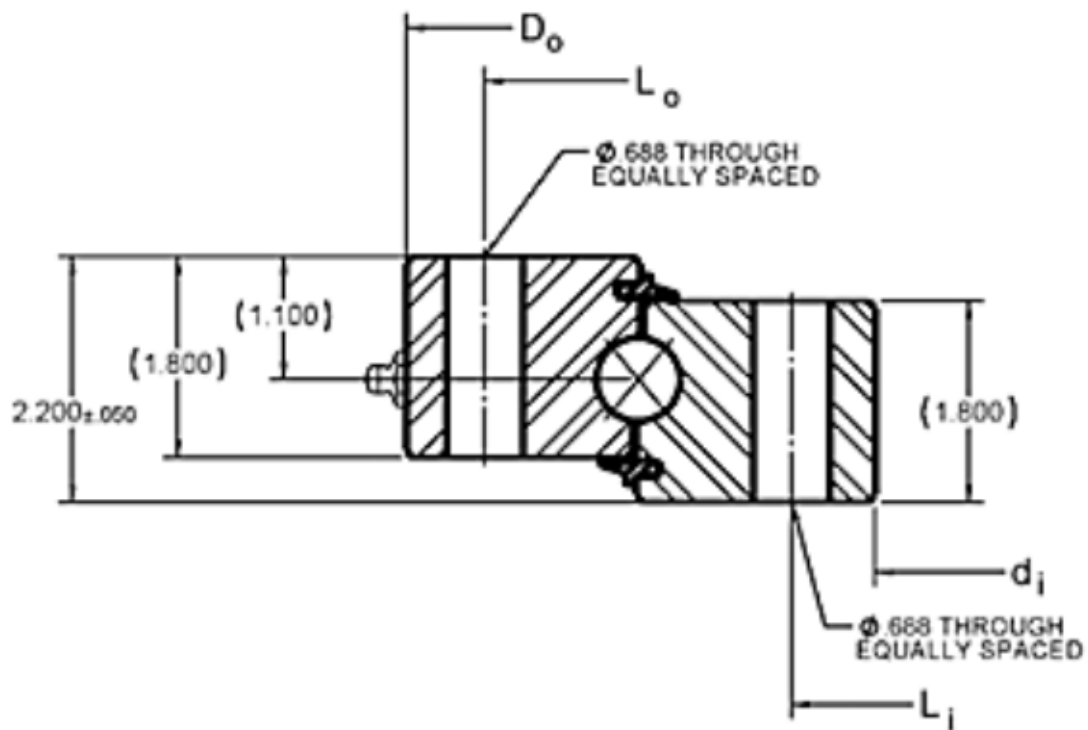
Drawing of Cross Section of Slewing Bearing (Part No. HS6-25P1Z) Used in Design Provided by Kaydon Bearing
